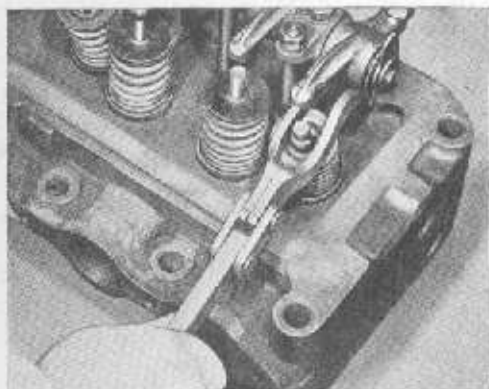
Removing the valves, using "Britool" Valve Spring Compressor No. 83B. The spring must be compressed with the tool as shown, before the tapered collars can be removed.
